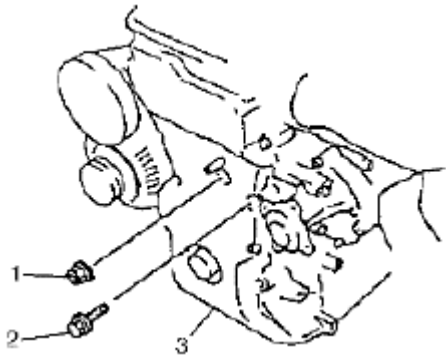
Identifying Timing Chain Cover Bolts & Nut
